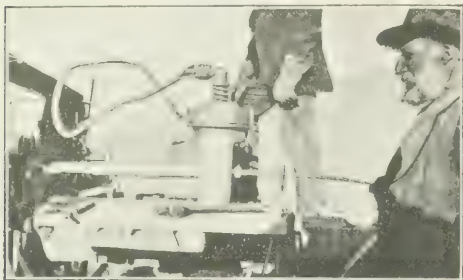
HYDRAULIC JACK USED IN MAKING CONNECTIONS ON ALUMINUM-STEEL CONDUCTORS
